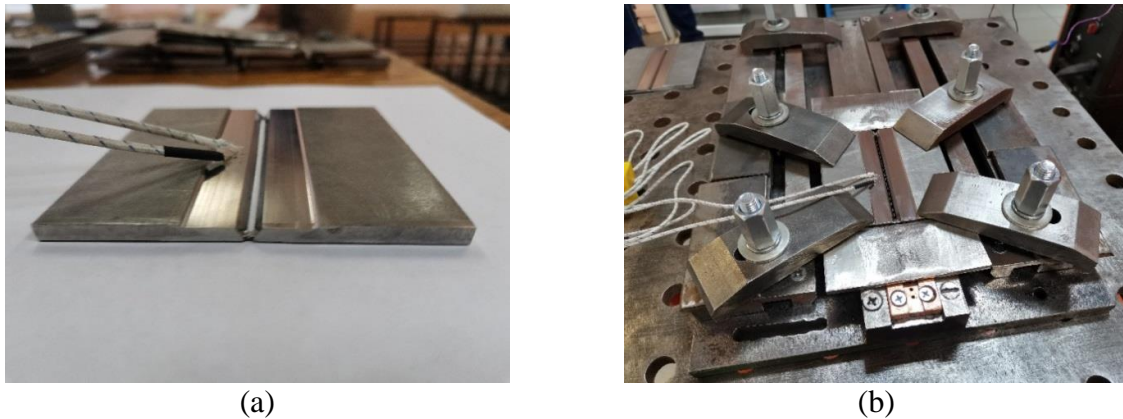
Places for installation of "K-type" thermocouples on a welded sample $100 \times 100 \times 4$ mm (a) and equipment for welding sheet blanks (b)
